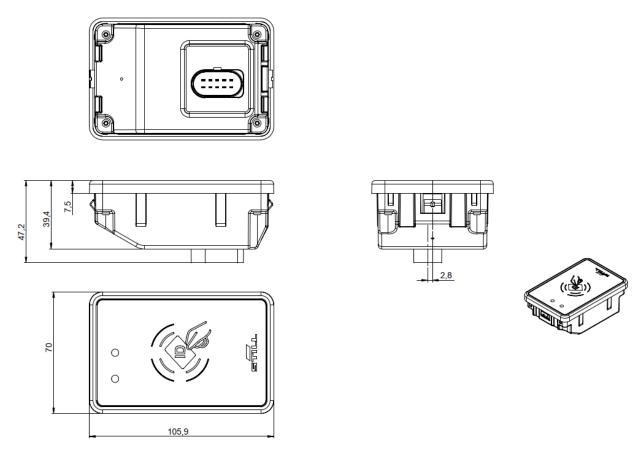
Mechanical Dimensions - KAP-R-UNI-KPL-S; KAP-R-UNI-KPL-L is the identical device with different imprint
